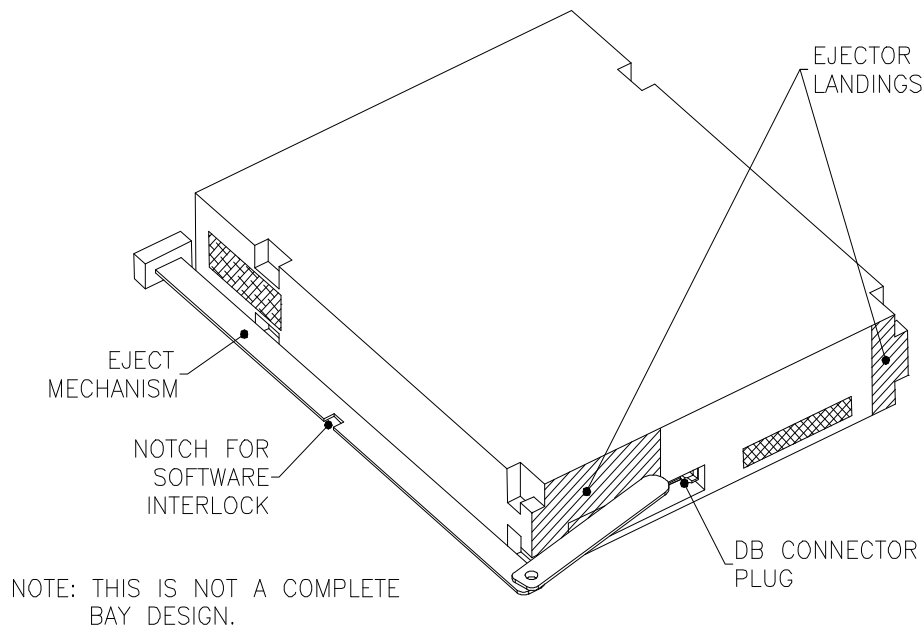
Example of DB32 Device Bay interlock mechanism
